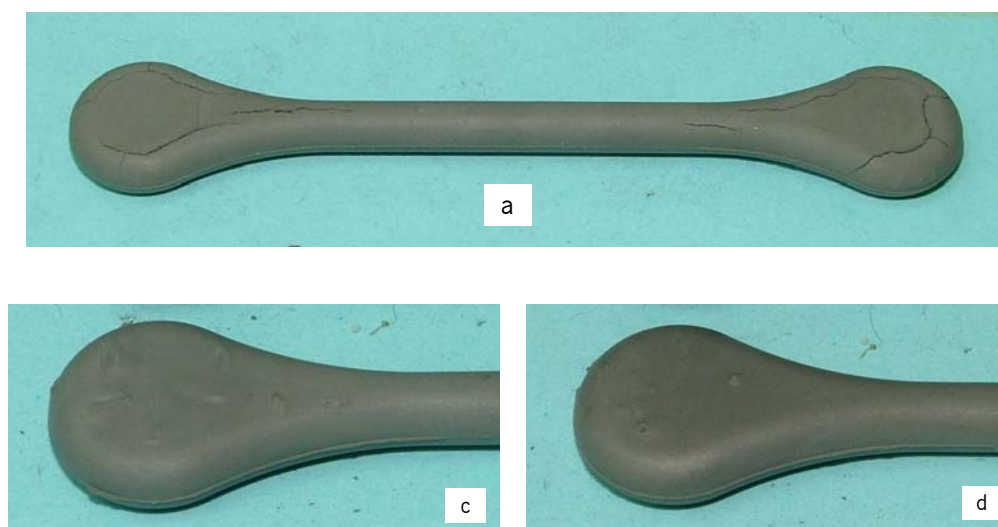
Defects detected on the debinded parts, referred on Table 4.12.
